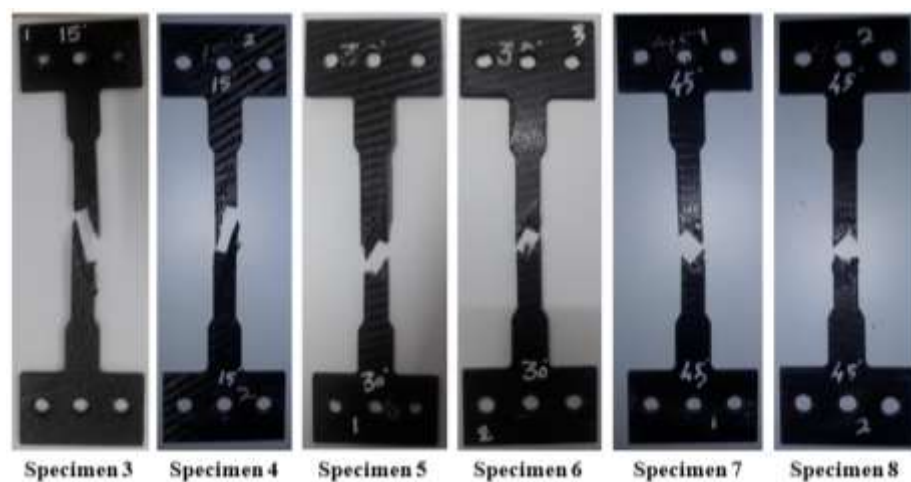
Failure of CFRC Specimens from the Gauge Length
